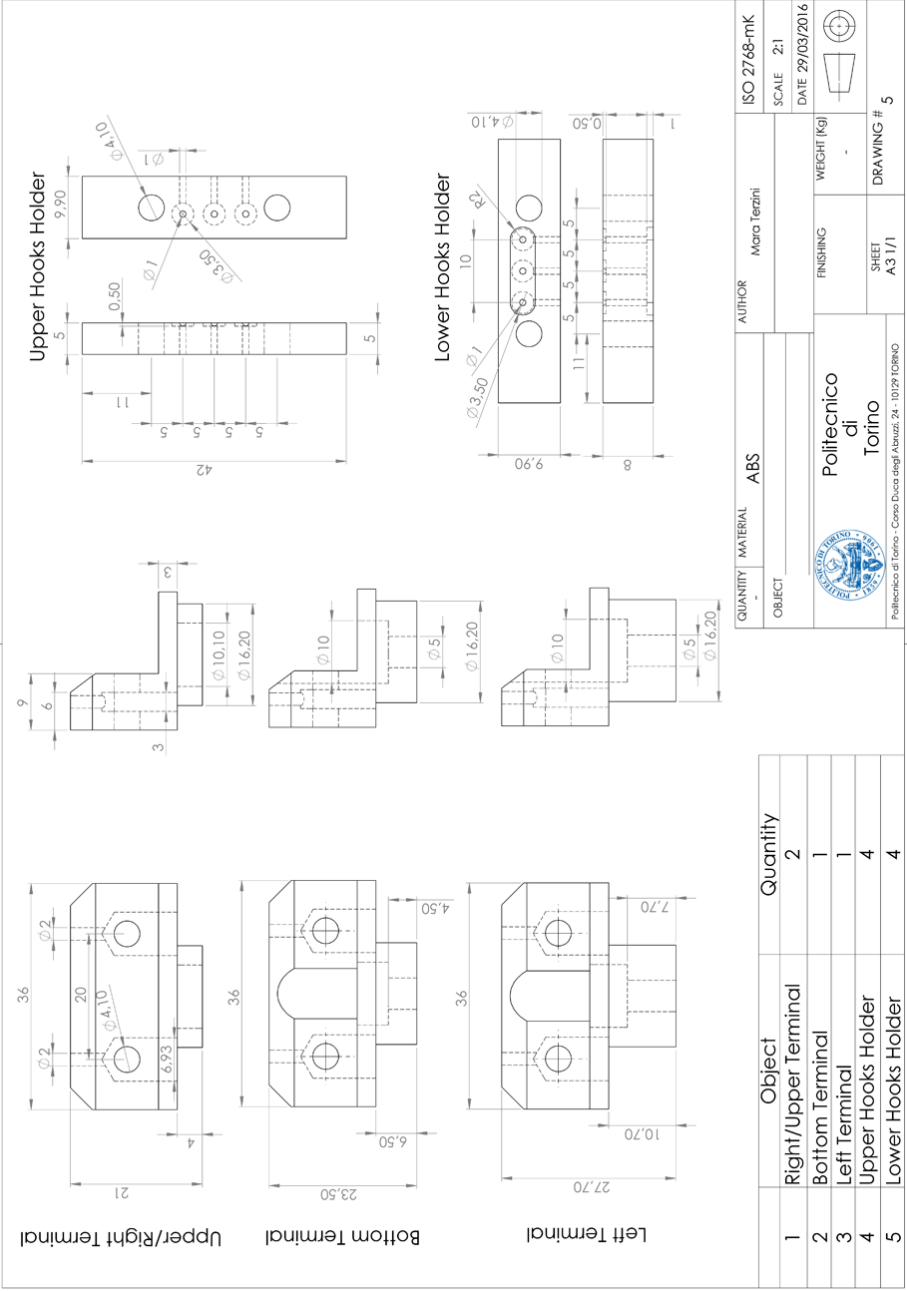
Drawing describing the four grippin terminals and the upper and lower hooks holder.
